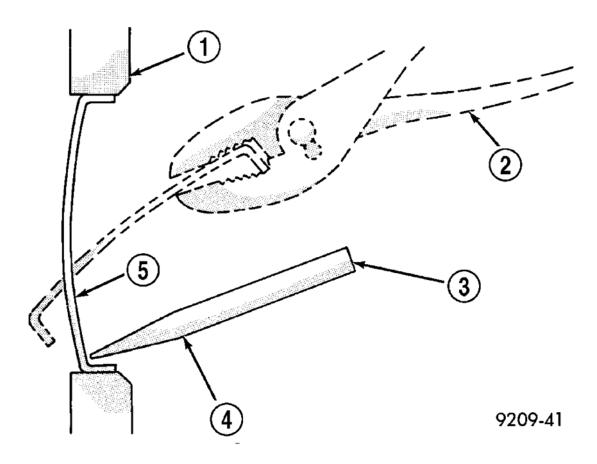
Removing Core Hole Plug Courtesy of CHRYSLER LLC
